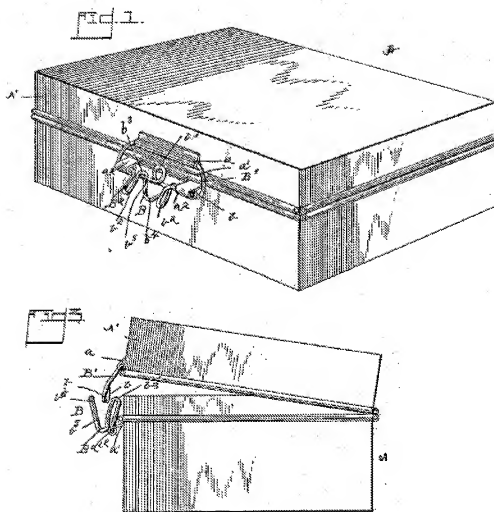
shows a box provided with fastener of Grove, and Figure 3 is a side elevation of the box fastener (*id.* at ll. 26-32).
